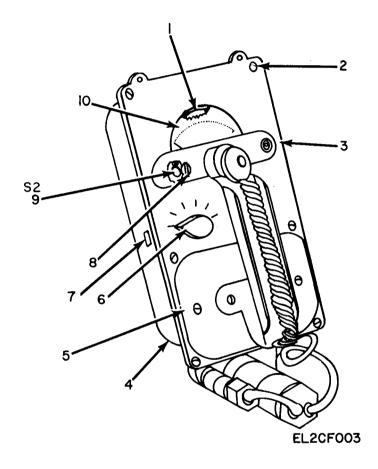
Radiac Meter IM-203/PDR-27R, Cover Assembly.
